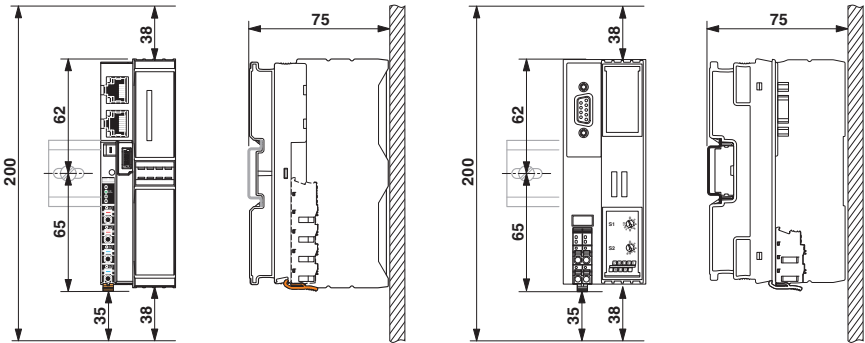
Mounting distances: bus coupler (dimensions rounded)
